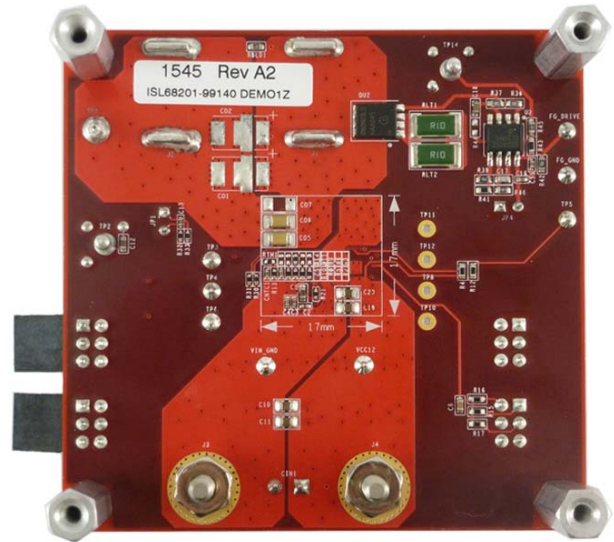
DEMONSTRATION BOARD BOTTOM VIEW
